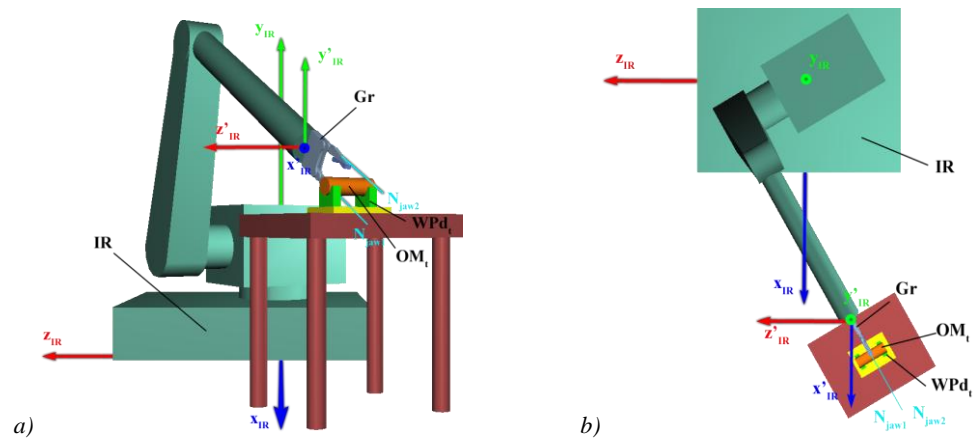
Example of OM_i clamping operation: a) 3D view; b) top view
